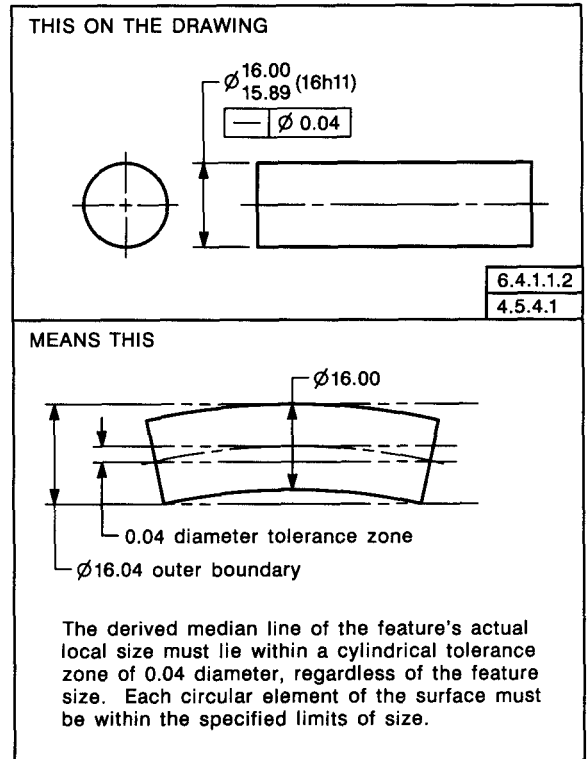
SPECIFYING STRAIGHTNESS RFS
